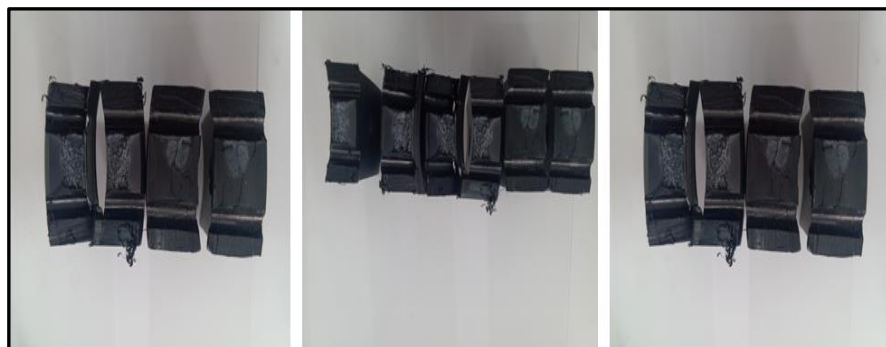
The brittle failure mode occurred from 3 tested samples out of 4 after performing butt welding on a manual welding machine
